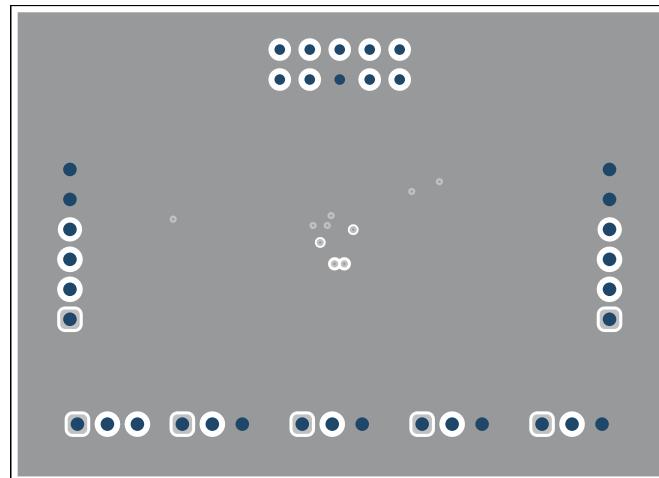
TPS6286x0EVM PCB - Signal Layer 1 (Top View)
